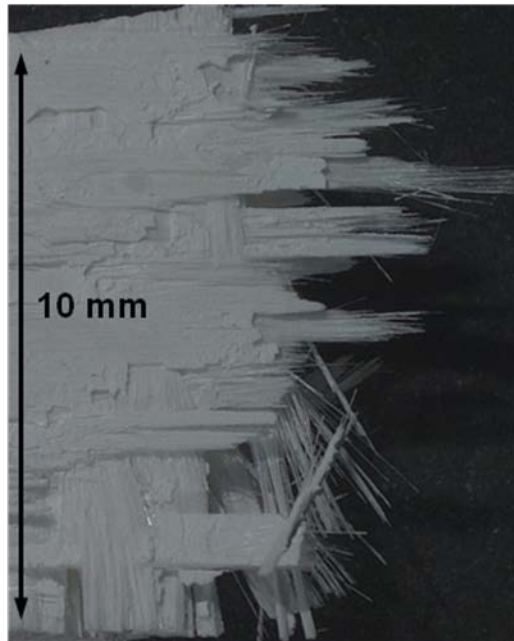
Fracture surface of the N720/AM specimen tested in tension to failure with constant loading rate of 25MPa at 1100°C in steam.
